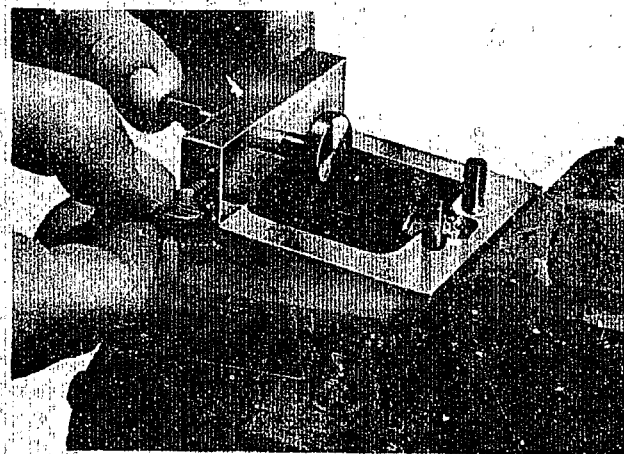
Locating "K" Dimension With TSE 79100 Tool
